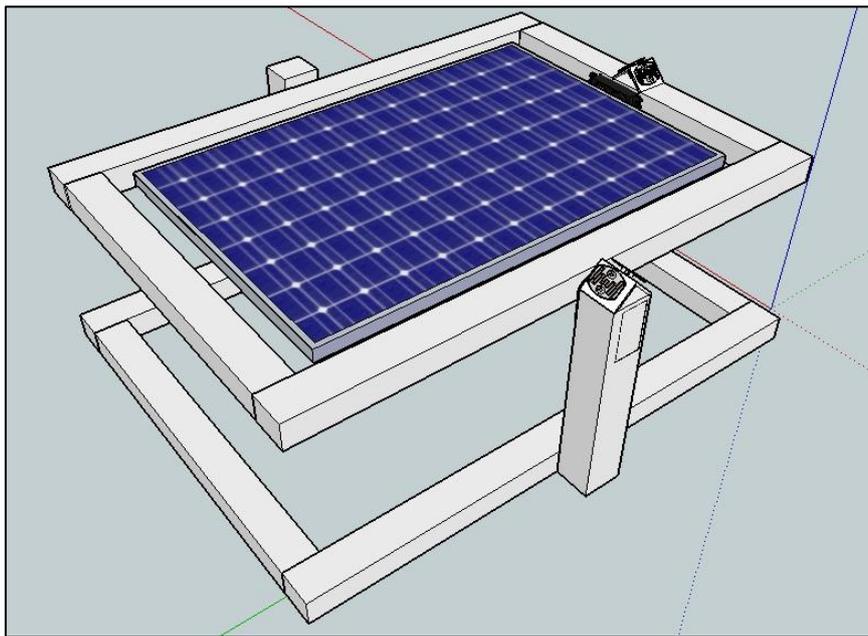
Dual Axis Solar Panel 3D drawing from right side
